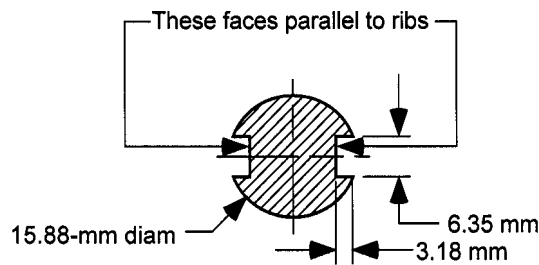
Cross section of resin-grouted rebar bolt machined for installation of gauges.
